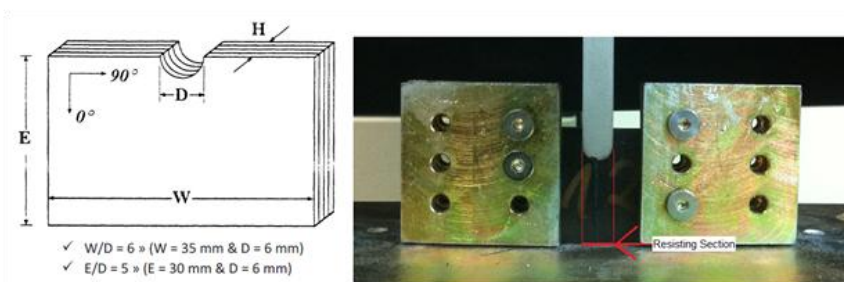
Dimension and Shape of coupons and apparatus for Pin-Bearing test.
